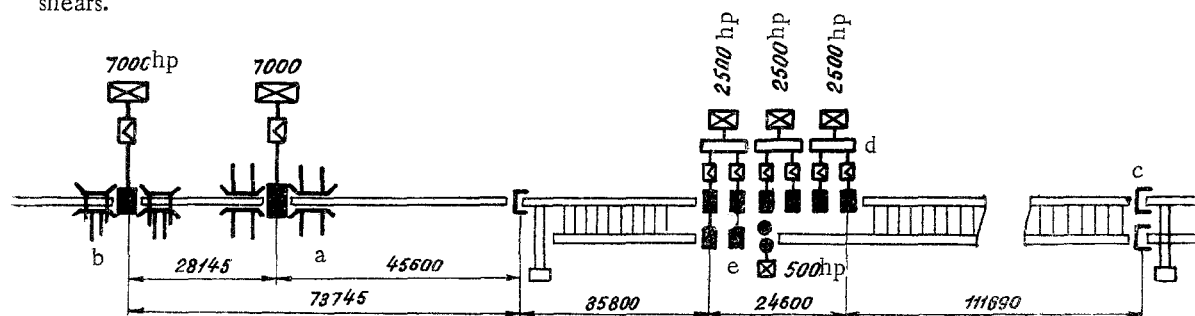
Layout of equipment at blooming mill No. 3: a) 1150 reversing stand; b) additional 1100 reversing stand; c) shears; d) 720 continuous billet mill; e) group of slabbing stands..
